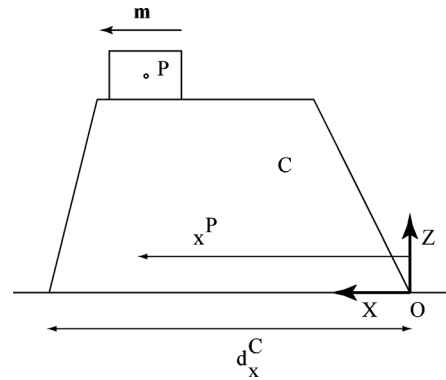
Stable example. Part P can move along its support surface without the assembly becoming unstable.
